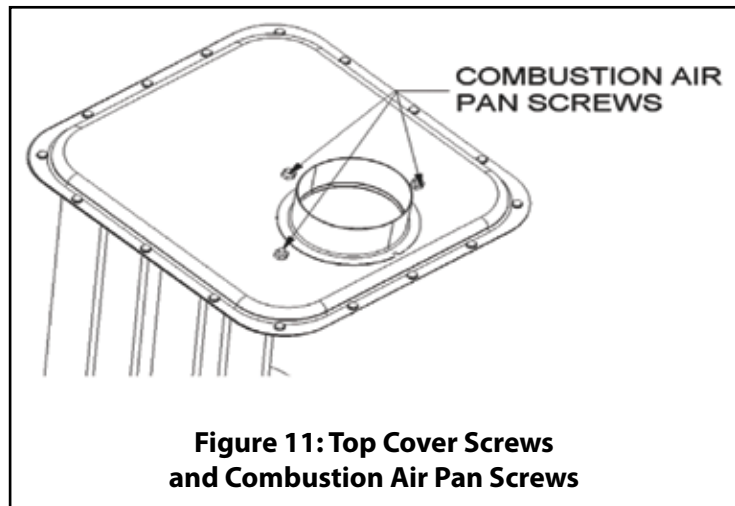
Top Cover Screws and Combustion Air Pan Screws
